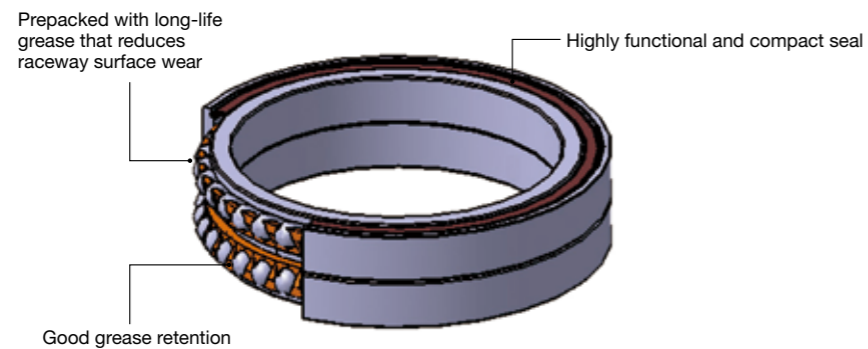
Structure of low-torque, highly rigid, thin-section, angular contact ball bearing fitted with outer seals
